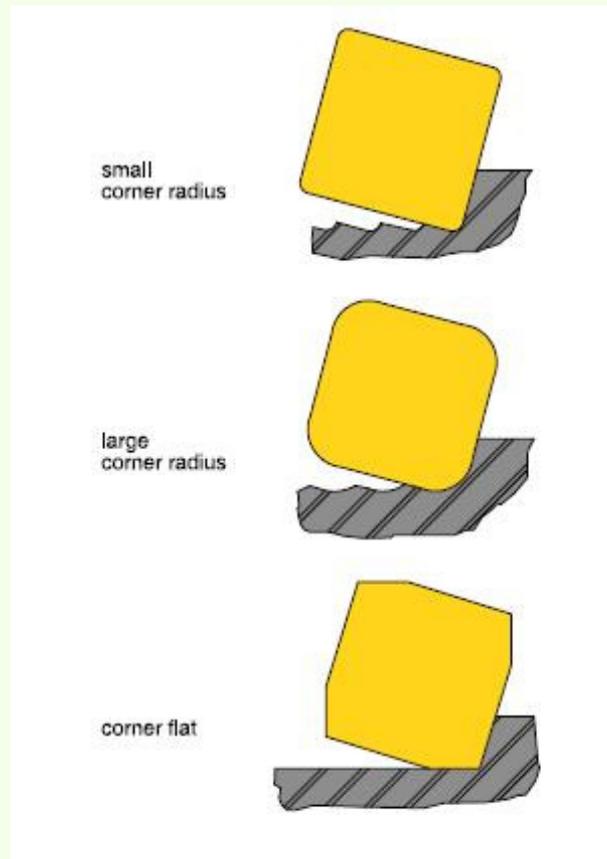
Larger insert corner radii or flats produce finer milling finishes.
